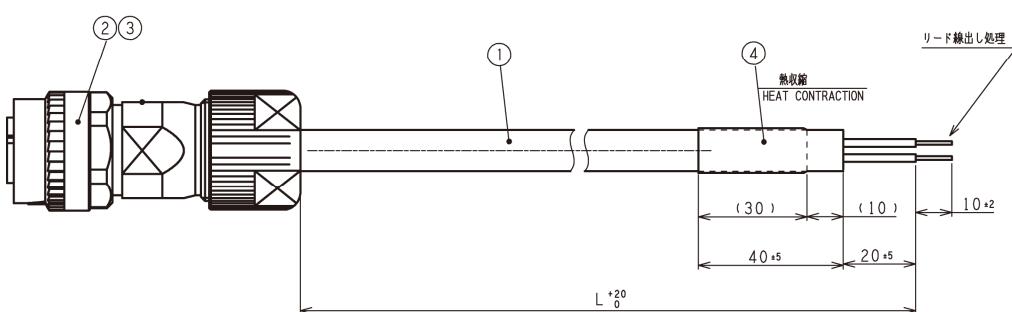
Brake Cable (1kW or more, for mobile)
